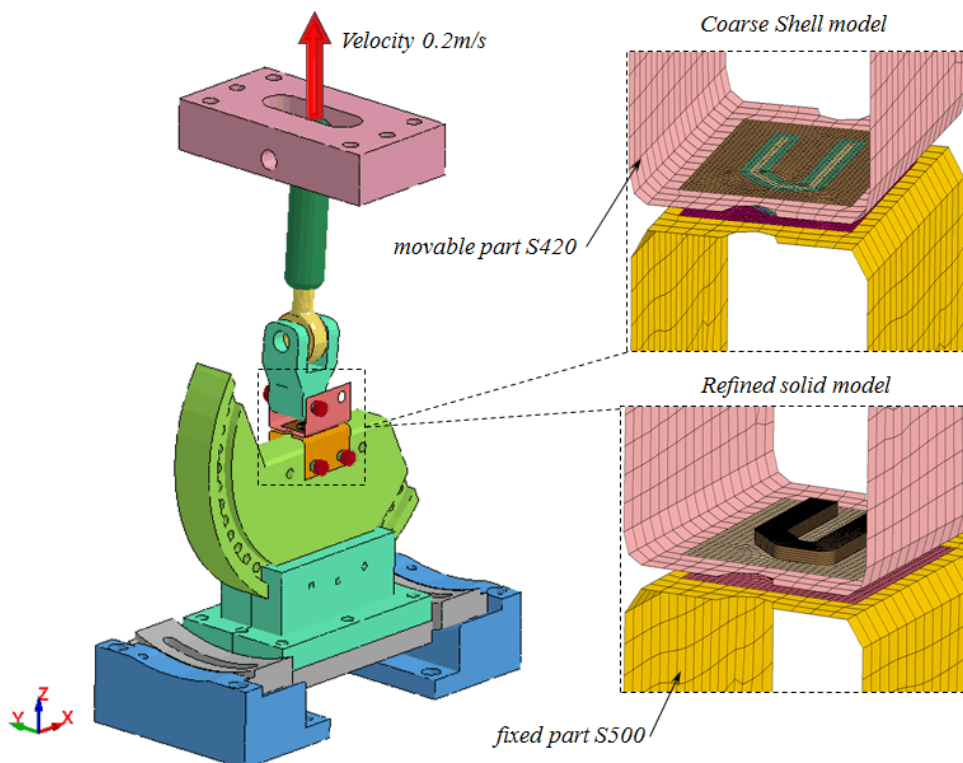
WSII laser welded benchmark subjected to peeling load.
